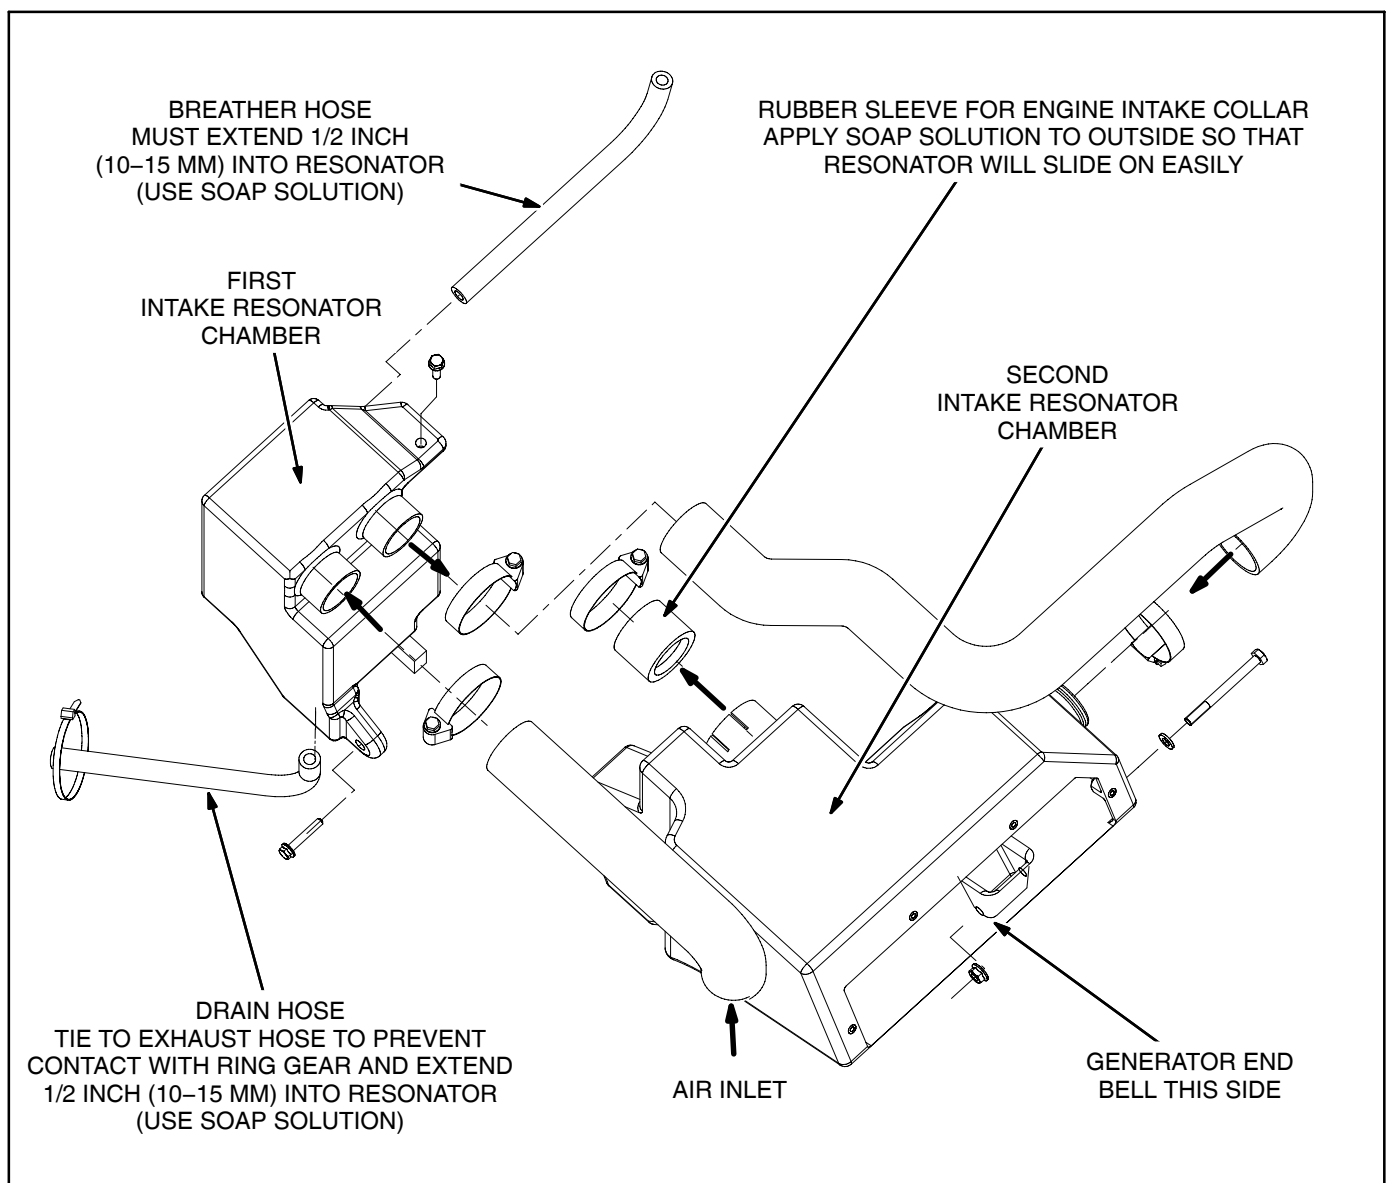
INTAKE RESONATOR ASSEMBLY
